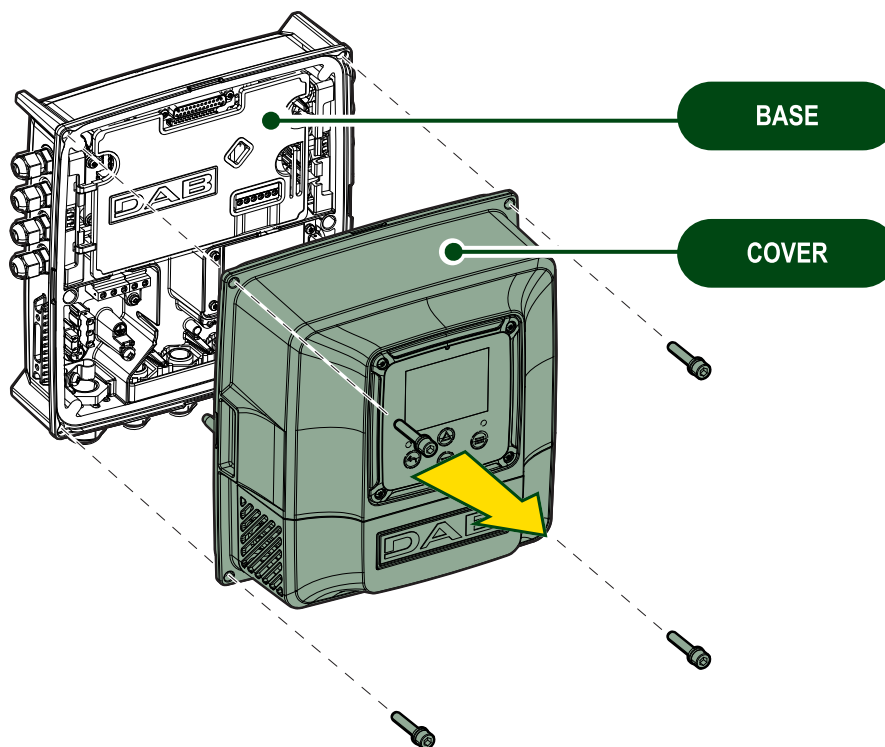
Spare part PCBA+COVER and 4 fixing screws
